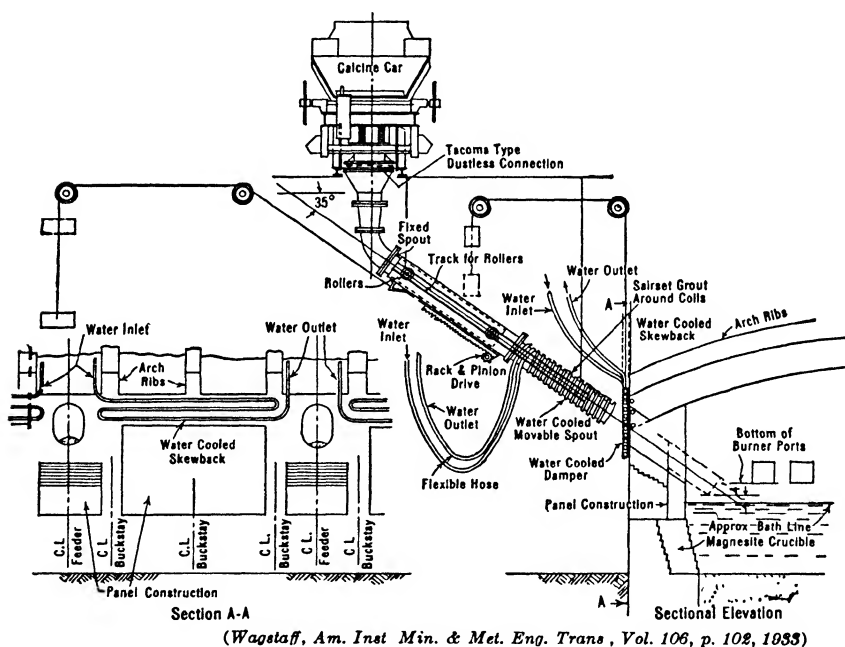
Principal Features of Gun Feeder and Construction of Side Wall.
